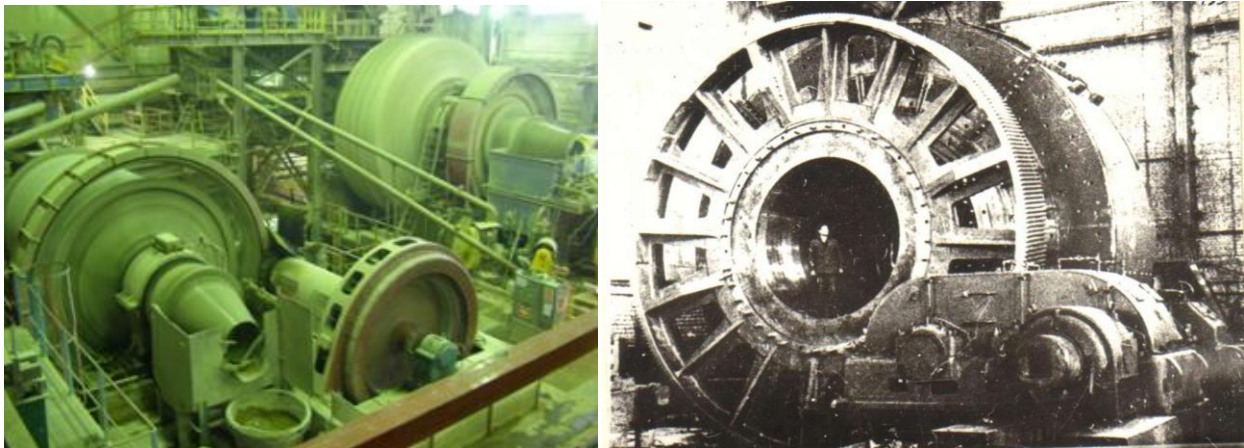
The general view of the ore-pulverizing mill of МБ 90x30 model with the reconditioned gear rim with the following dimensions $m = 28$ mm; $z_k = 284$, $D_a = 8058,4$ mm
